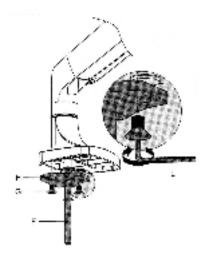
Using a 4mm (5/32) Allen wrench, unscrew the flat head screws (G) holding the clamp to the arm.
